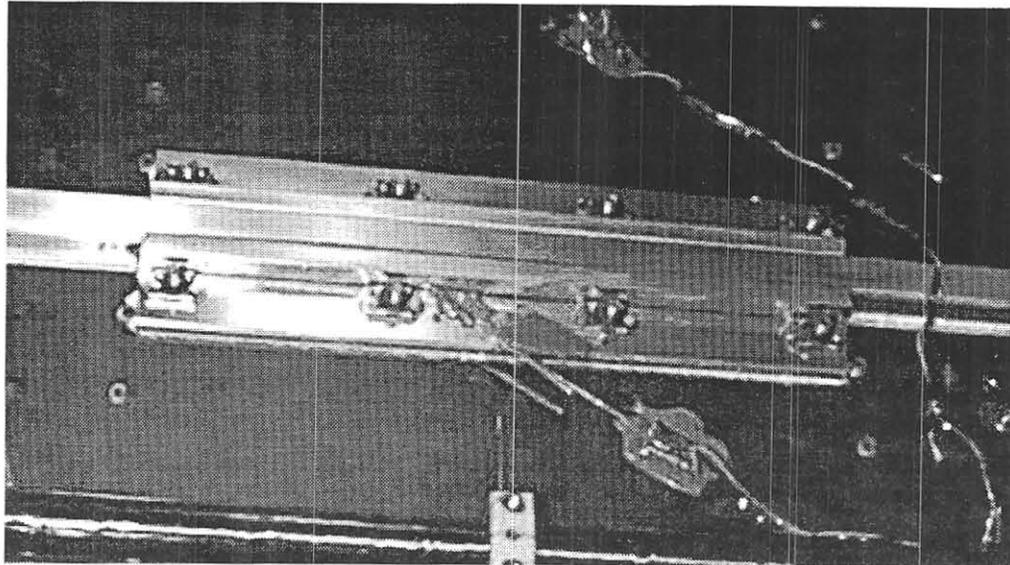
Heat Pipe & Heat Pipe Clamp Assembly Mounted in Spacecraft.
